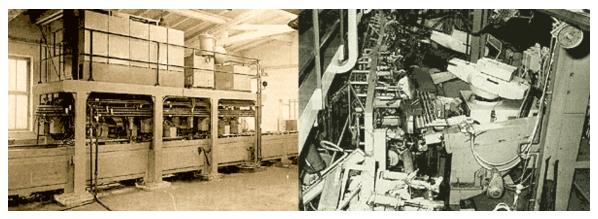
Fig. B. I : multi-spot welding transfer line for Volkswagen (left) and autonomous welding robots at the Daimler-Benz factory (right)
